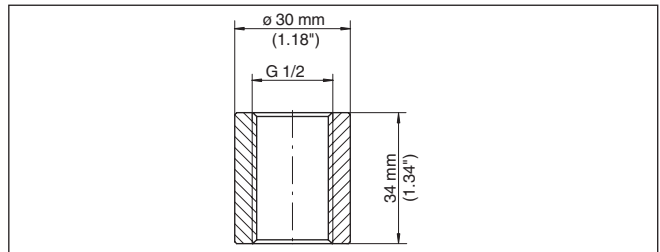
Dimensions of welded socket, thread G $\frac{1}{2}$ (EN 837) - manometer connection
